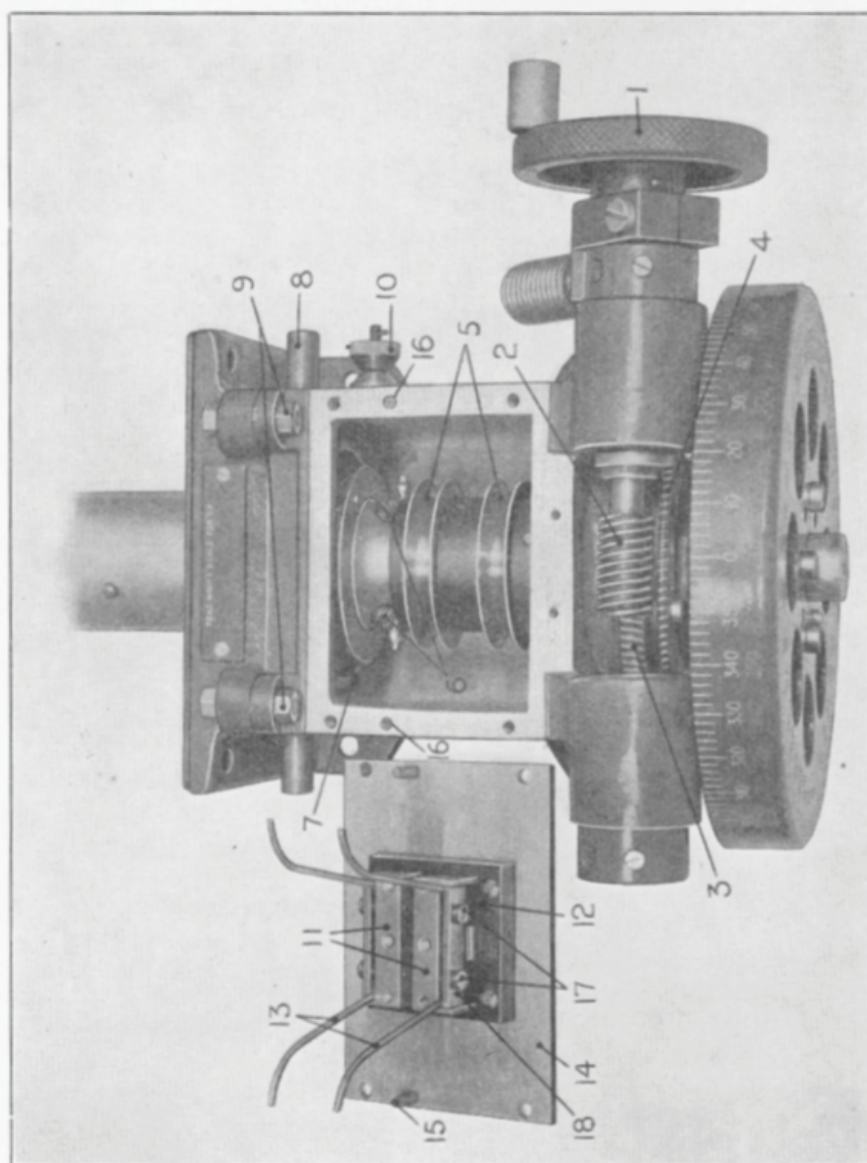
COVER REMOVED TO SHOW SLIP RINGS.
